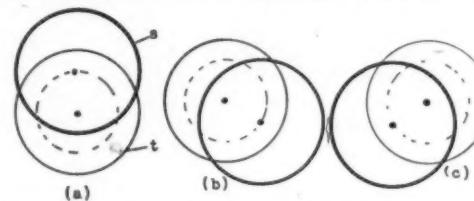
Showing positions of speculum and tool in circular stroke. s, speculum; t, tool
